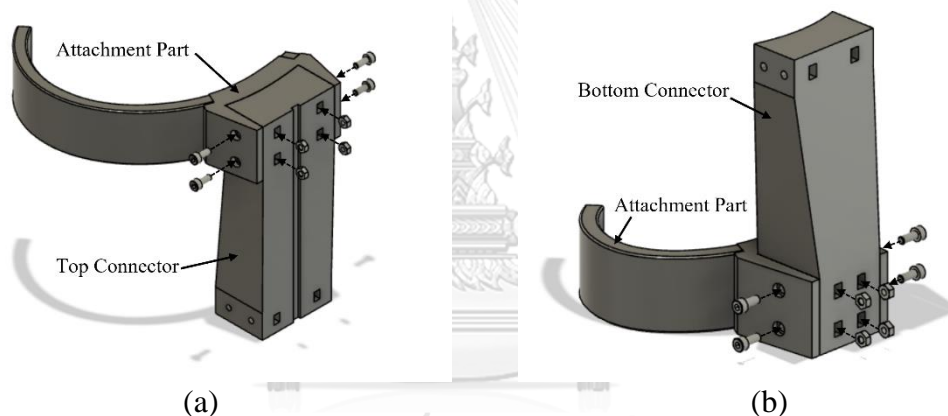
The body and attachment section of upper part (a) and lower part (b).
